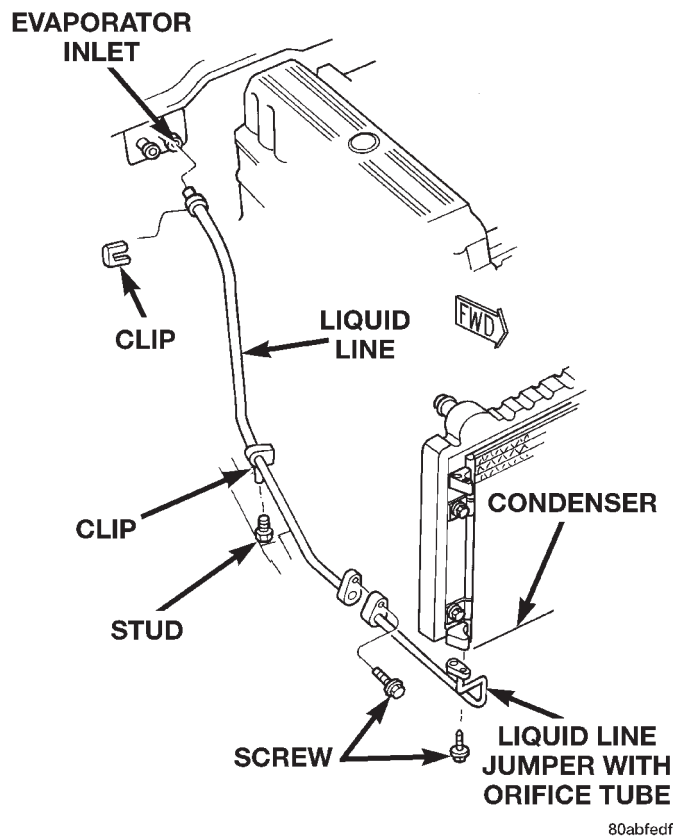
Liquid Line Remove/Install - Left-Hand Drive 2.5L Engine
